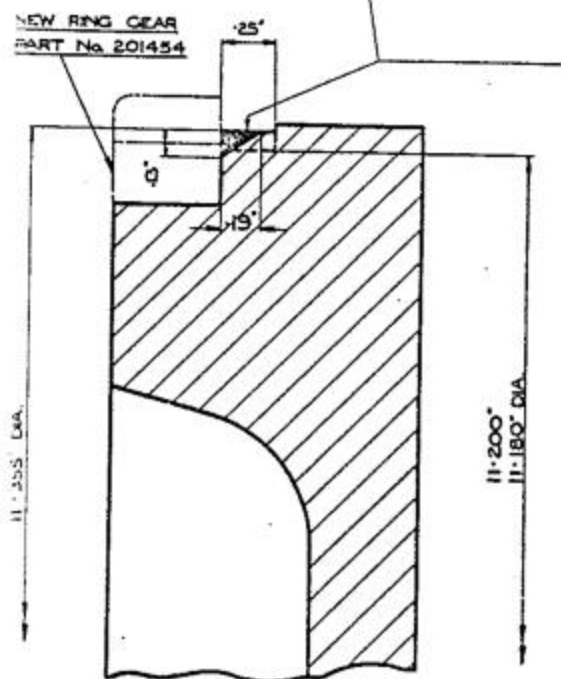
Showing modifications required to flywheel to accommodate 8/10 pitch starter gear
